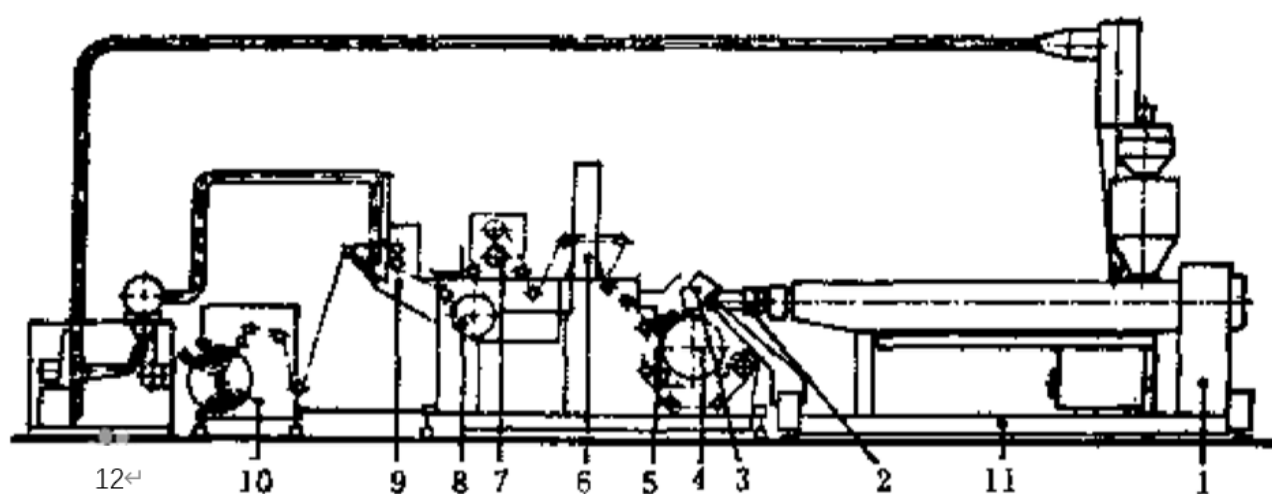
1-Extruder; 2-connector and filter; 3-head; 4-cold roll; 5-air knife; 6-thickness gauge; 7-pretreatment device; 8-post cooling roll; 9-cutting device; 10-winding machine; 11-positioning device; 12-side strip recovery device.
